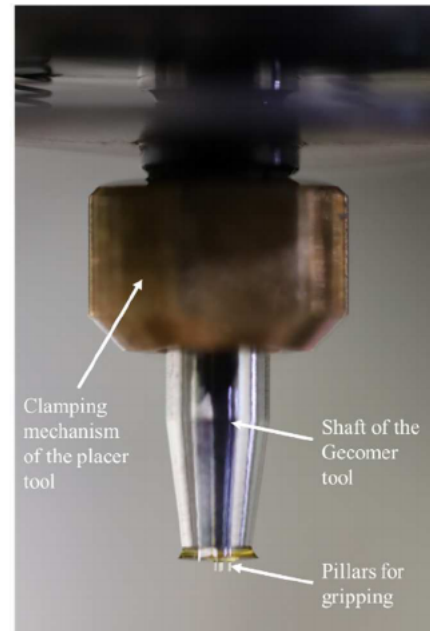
Detailed picture of the tool head of the machine with the Gecomer® gripper.
